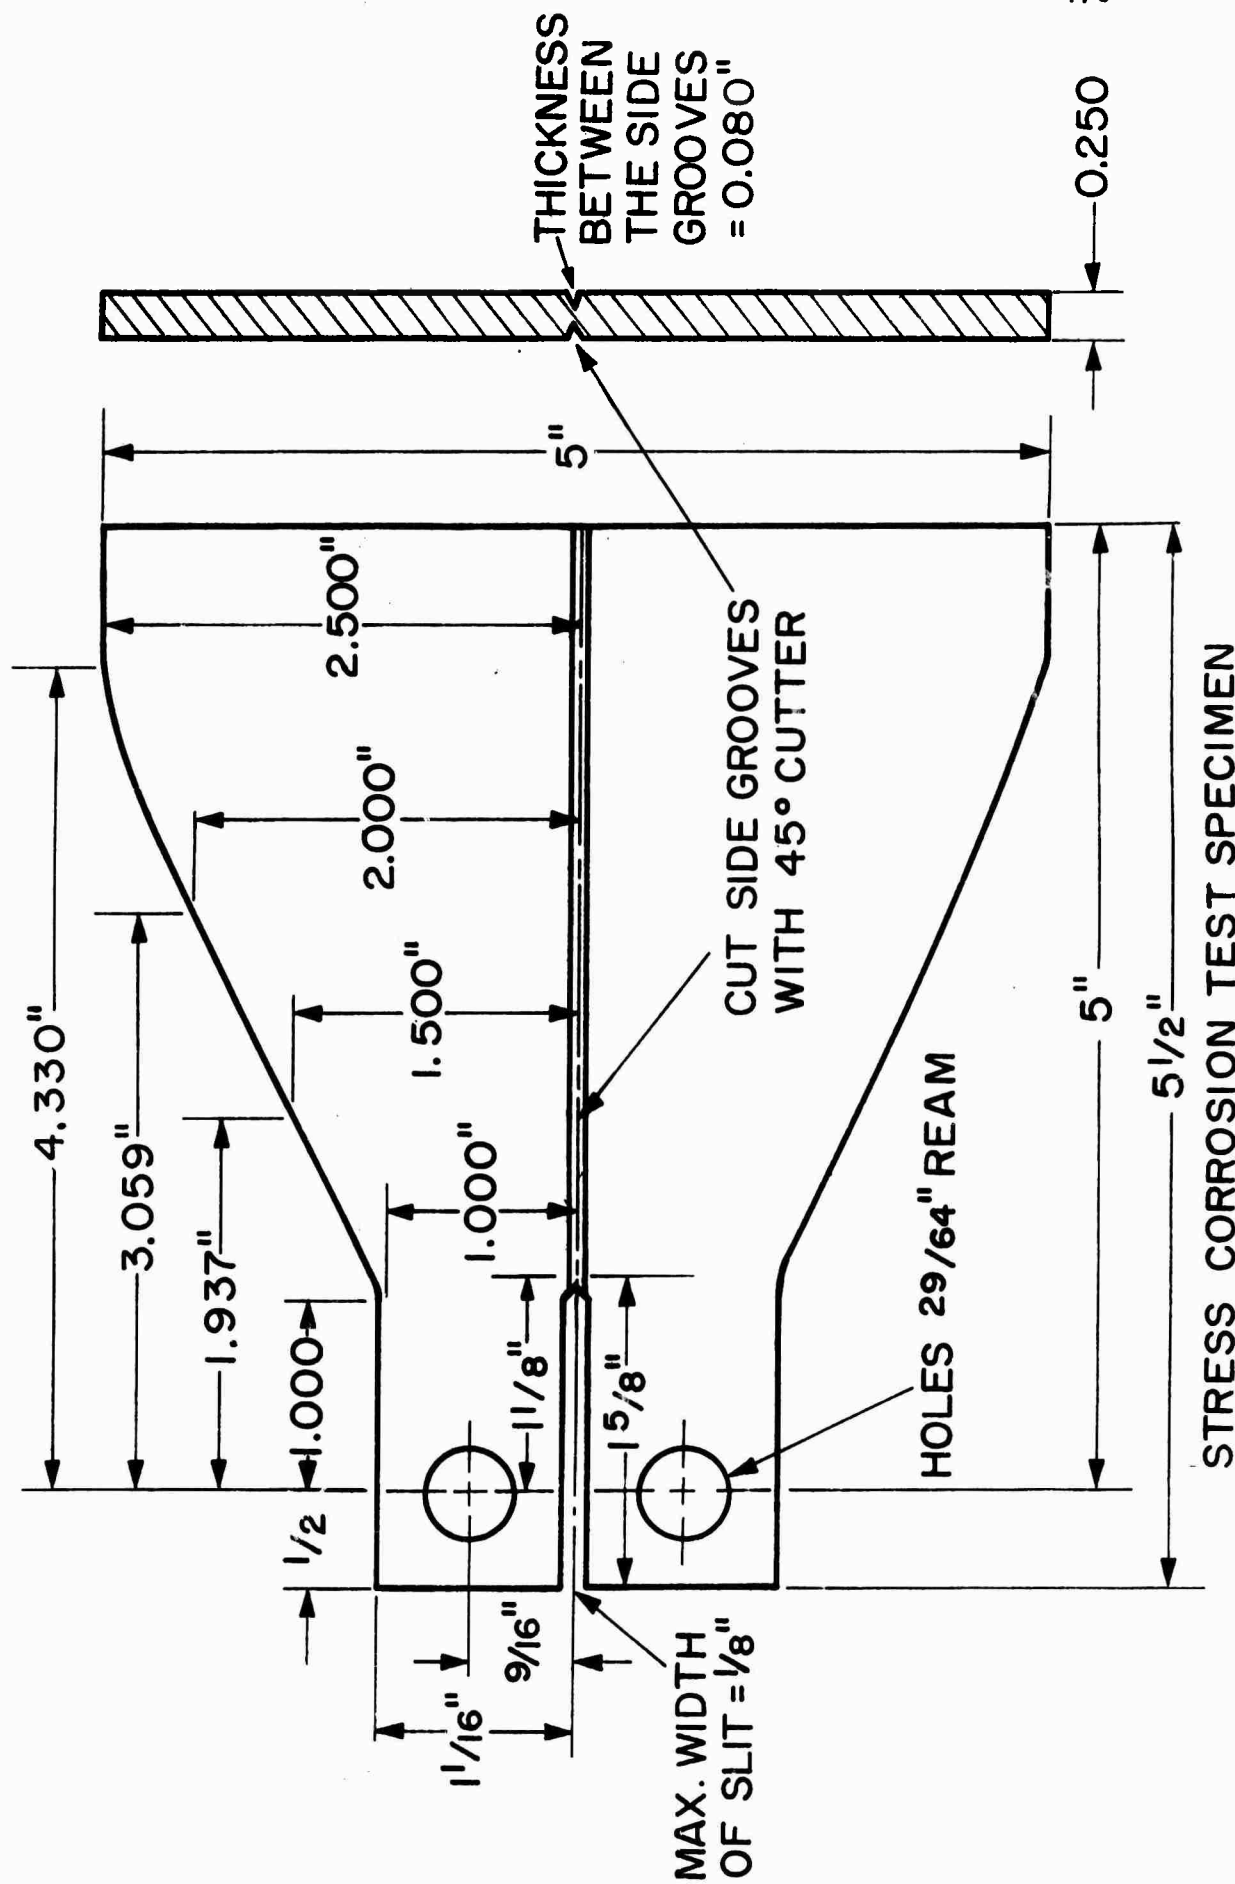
Specimen chosen for the stress corrosion cracking measurements.
